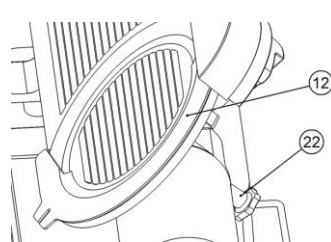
DISASSEMBLY BLADE GUARD PLATE
